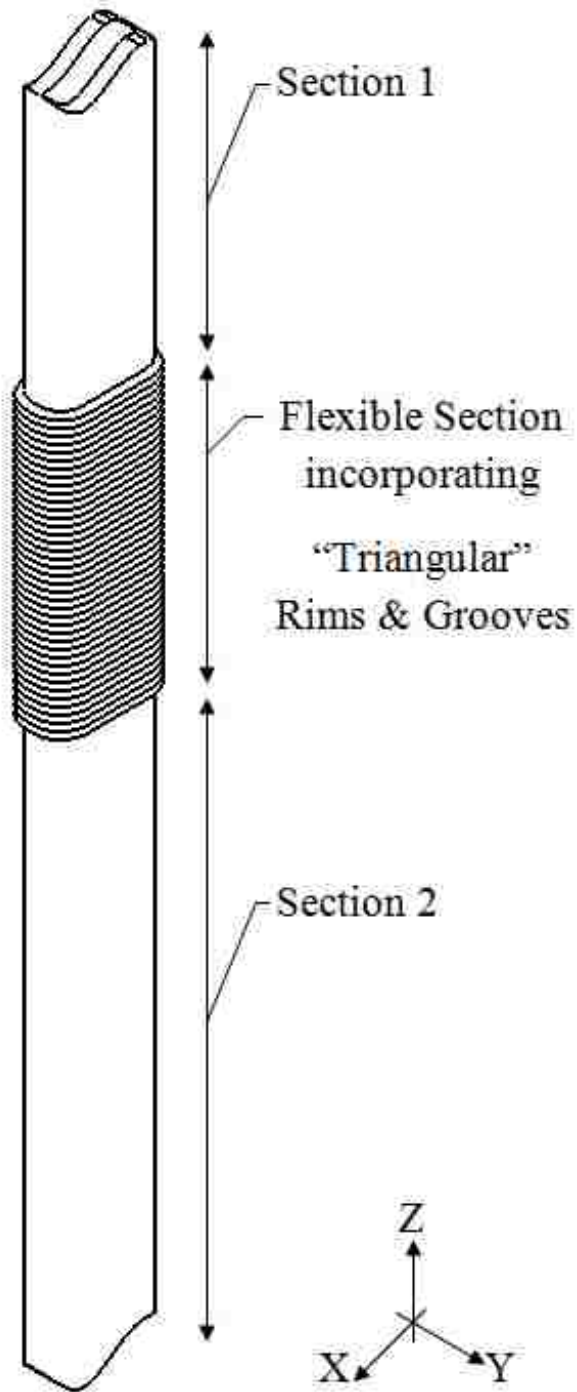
Isometric View. Straight Rectangular-bodied Flexi-Drain with a Flexible Section composed of “Triangular” Rims and Grooves. Section 1 and Section 2, which respectively connect to the Upper and the Lower extensions of the Flexi-Drain are shown as well.
